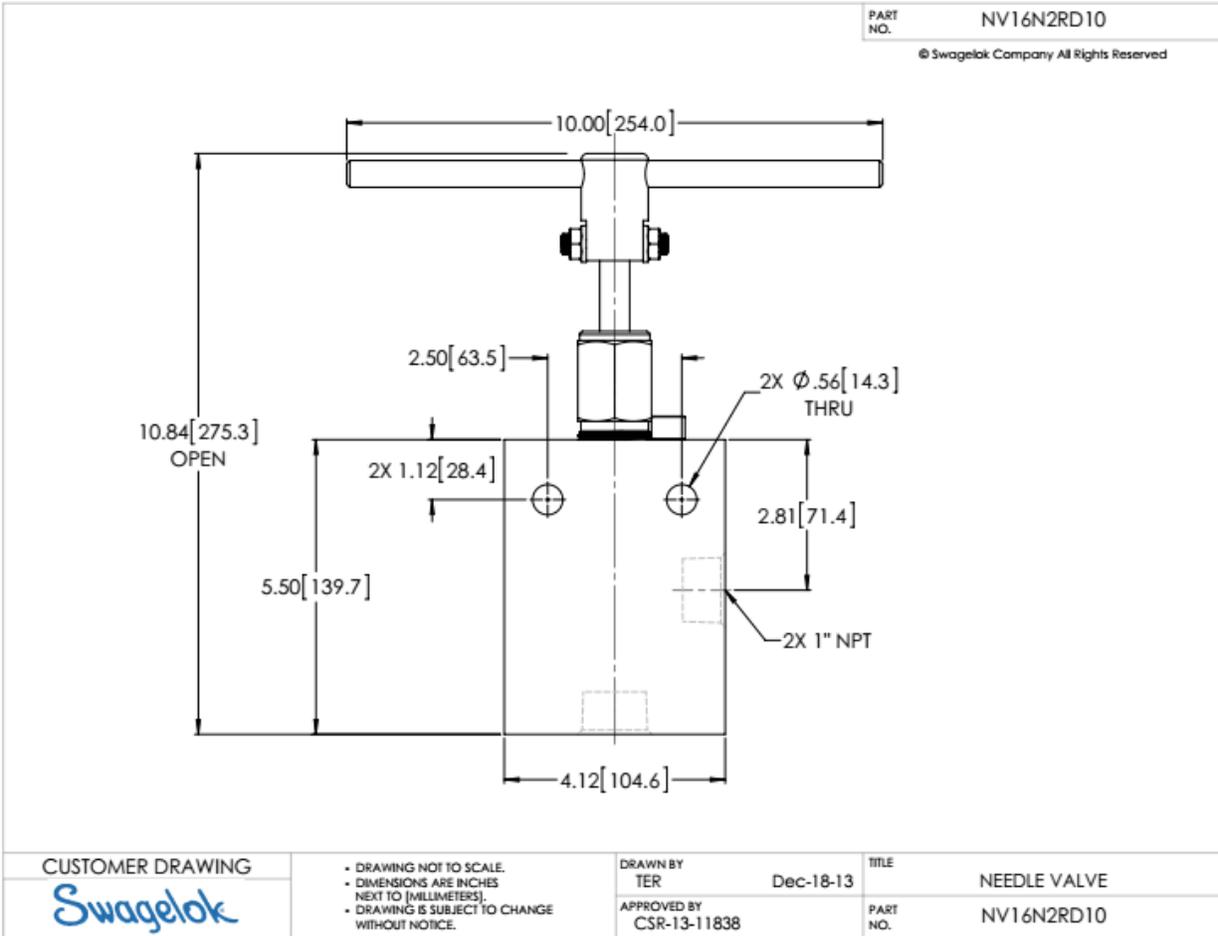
Manufacturers Drawing for Needle Throttling Valve
